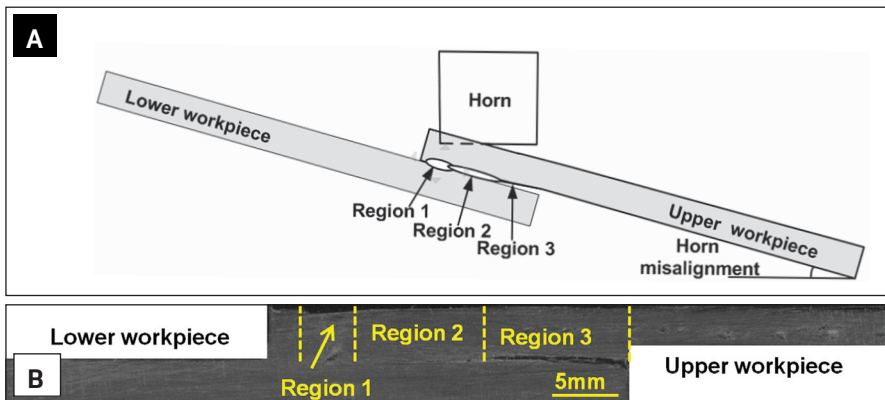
A — Schematic of ultrasonic welding with a horn misalignment; B — cross section of a weld made with a horn axial misalignment.
